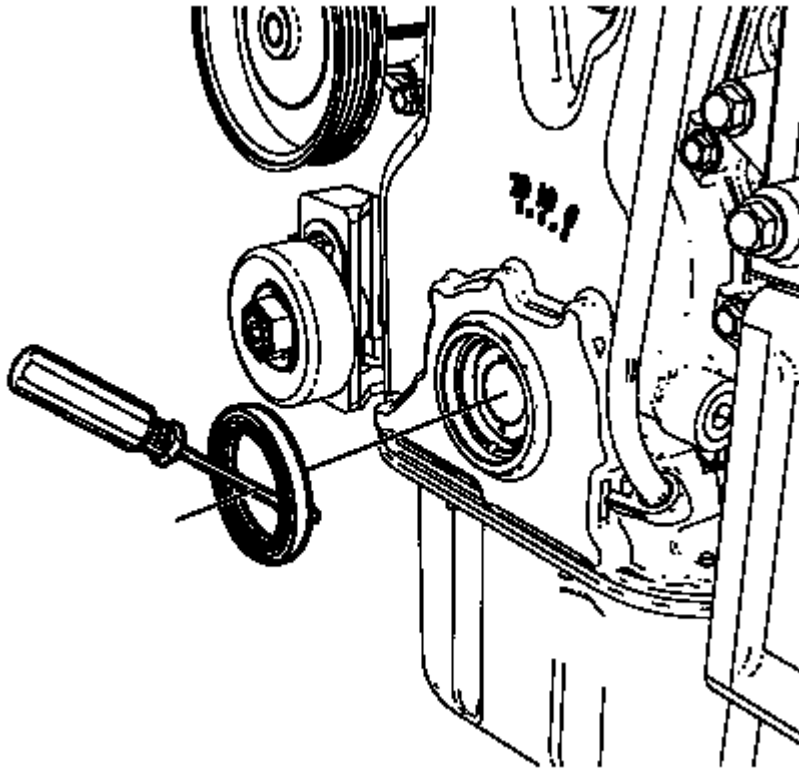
Using Flat-Bladed Tool To Remove Seal From Front Cover
